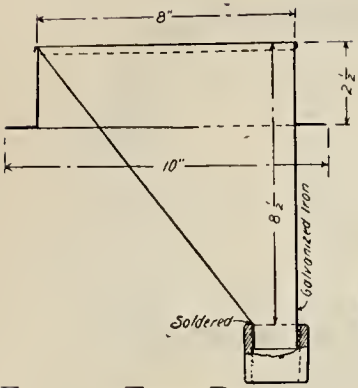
ERIE RAILROAD HOPPER FOR SAND DRIER.
